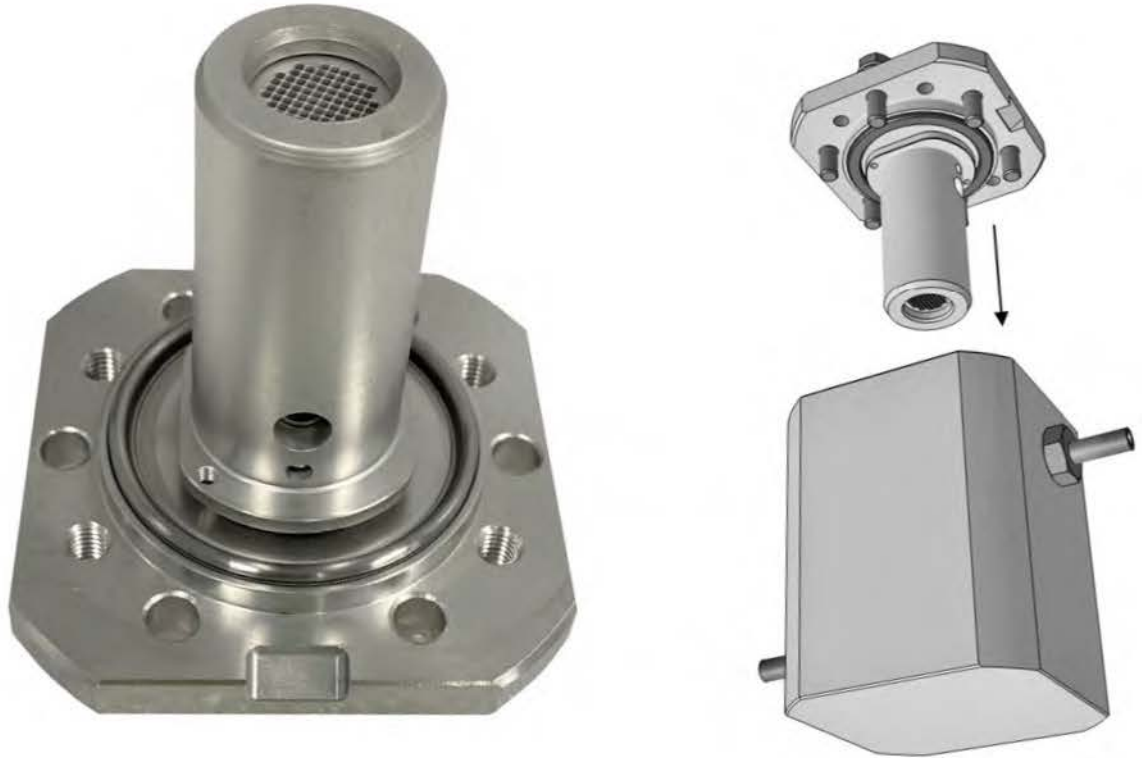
[Left] Thick 316 stainless steel body of the developed deuterium getter trap container for the LYDER experiment. [Right] Fabricated deuterium trap components that make up the yttrium basket. The arrows indicate the assembly steps of the basket attached to the trap lid.
